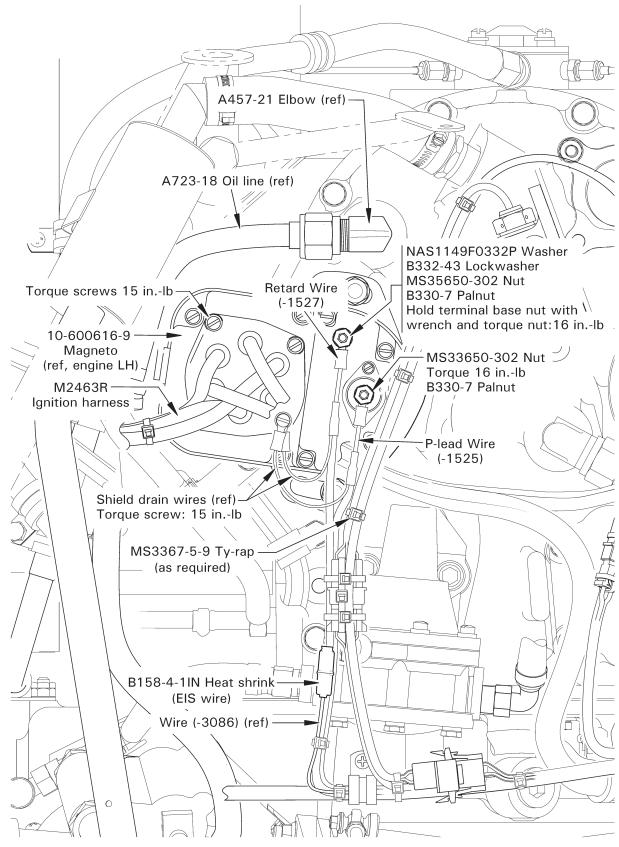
R44 II CMI magneto installation, engine LH shown (View looking aft; R44 similar)
